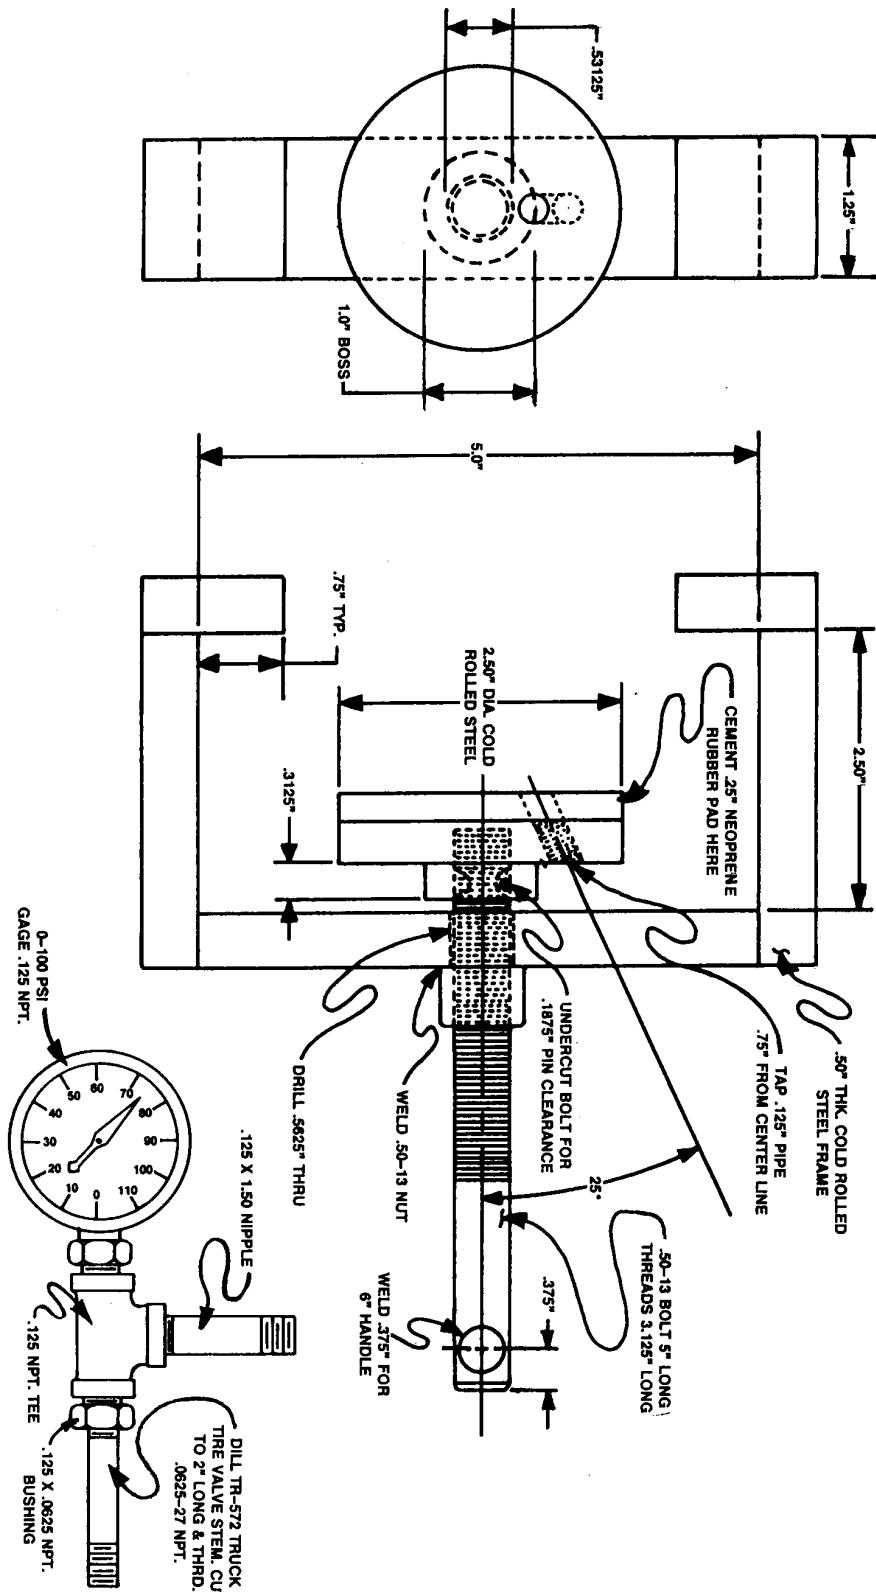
OIL CONTROL PLUG LEAK TEST FIXTURE
